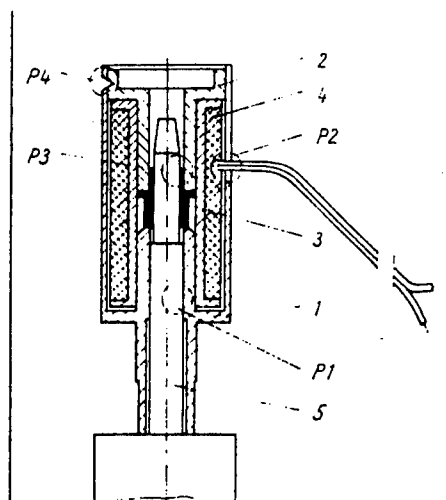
Assembled Module on the Joining Spindle (1=Sleeve; 2=Steel bushing; 3=Plastic bushing; 4=Coil subassembly; 5=Joining spindle; P1-P4=Explanation in the text)
